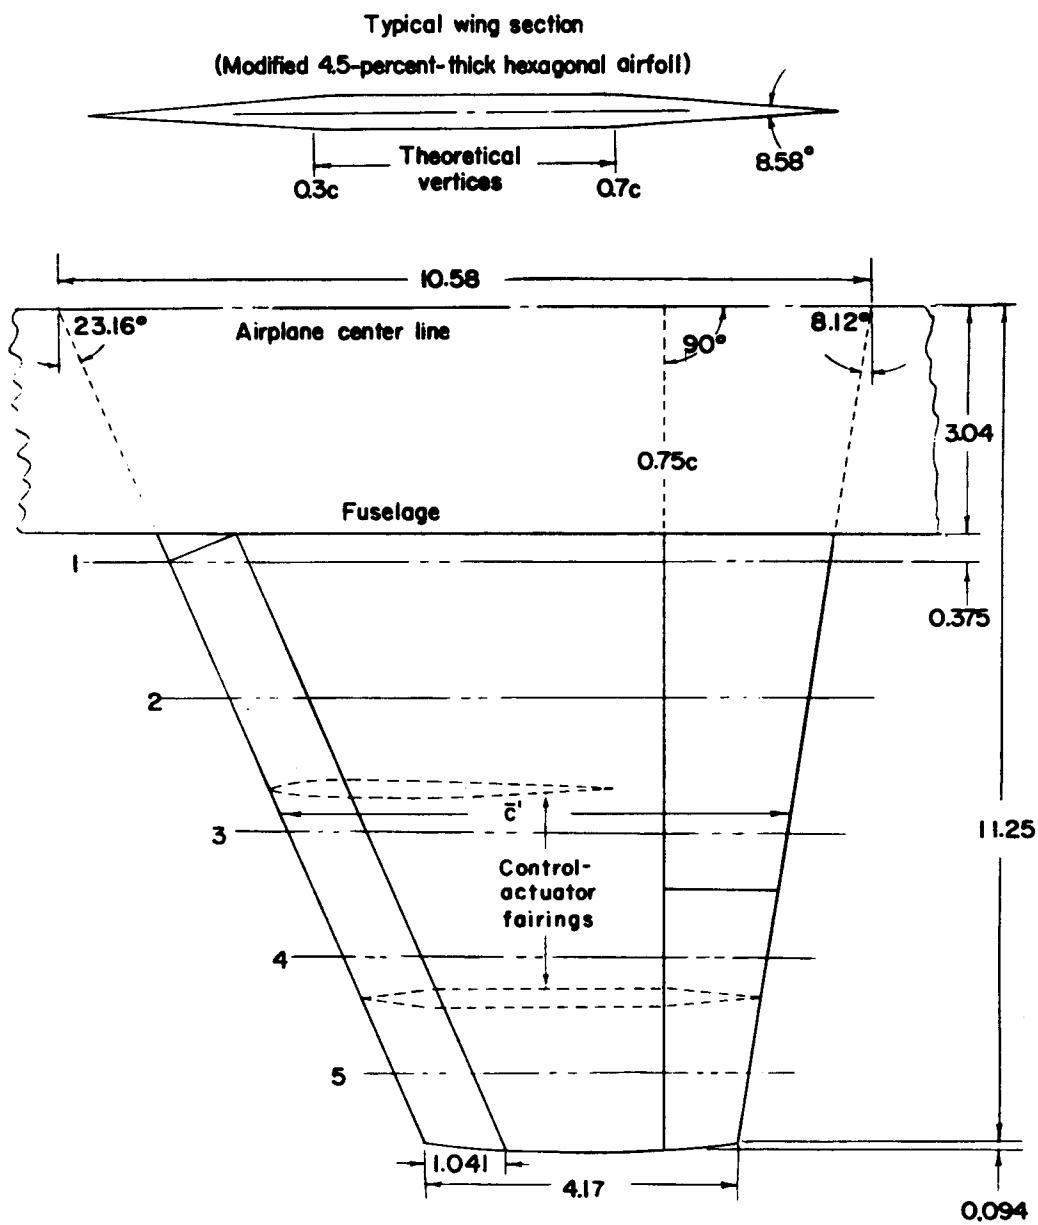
Drawing of the left wing of the Douglas X-3 airplane showing the spanwise location of the orifice rows. All dimensions are in feet unless otherwise stated.
